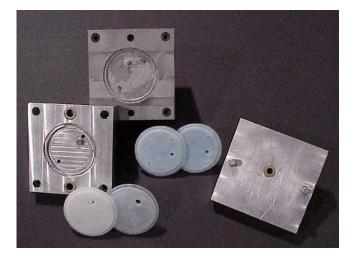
Completed mold base, prototype insert and machined insert with injection molded parts
